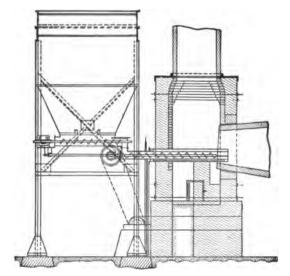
Kiln Feed by Jacketed Conveyor.
